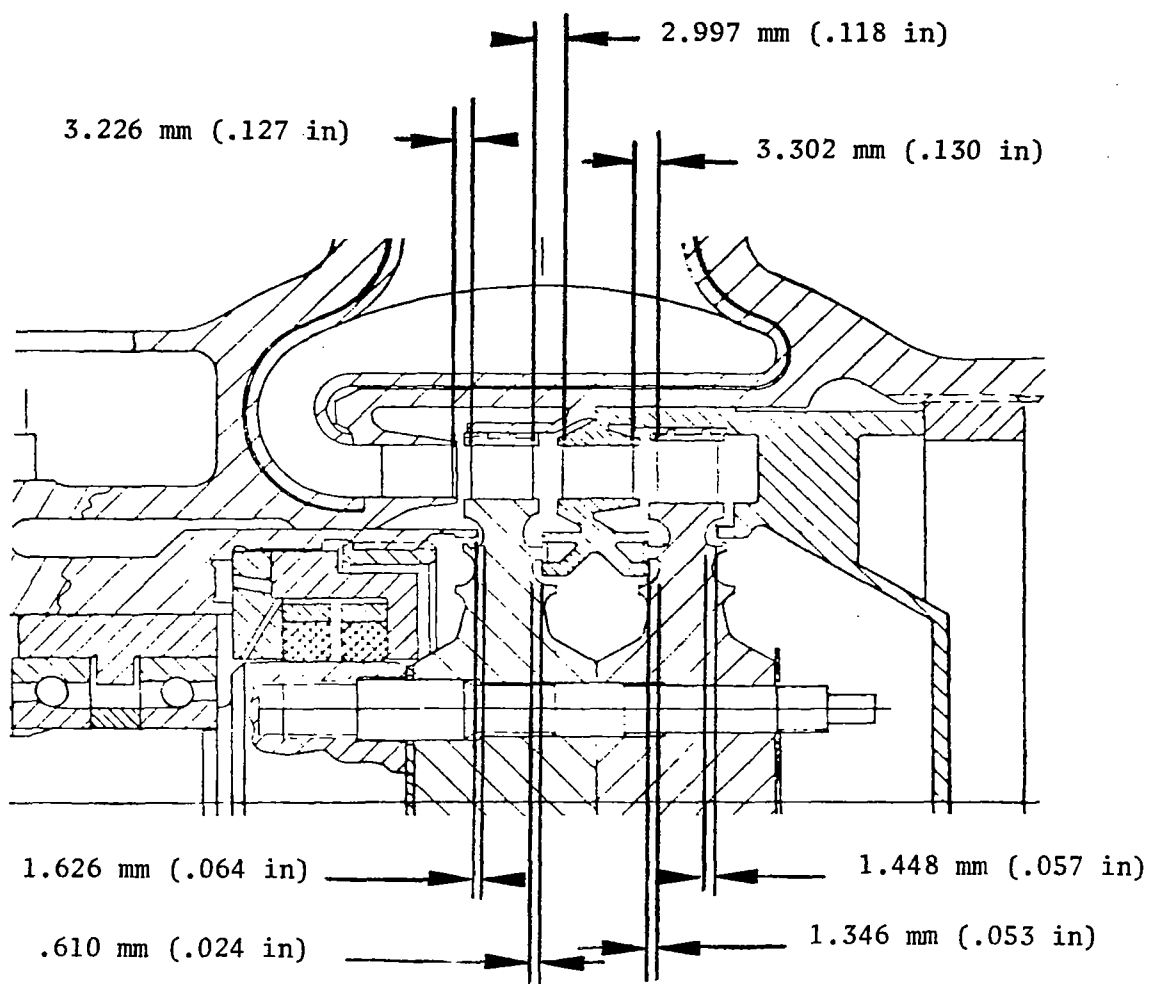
Mark 48-F Turbine S/N 01-0 Axial Clearances
